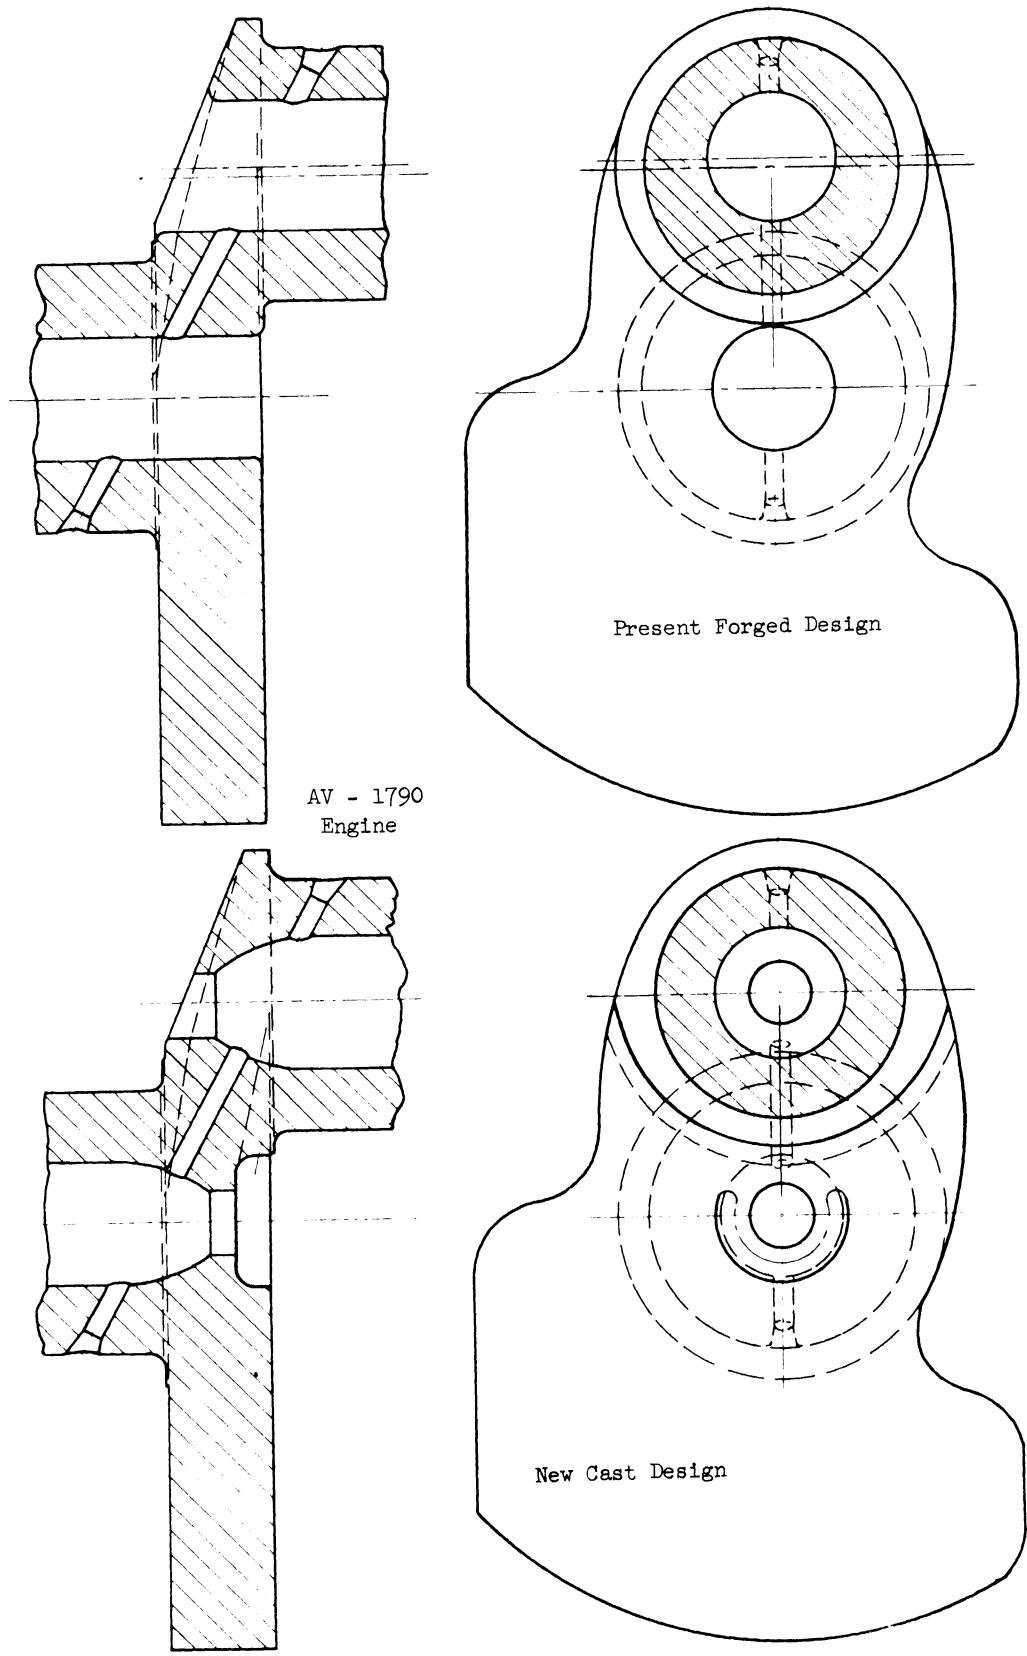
Cast and Forged Crankshaft, AV-1790 Engine.
